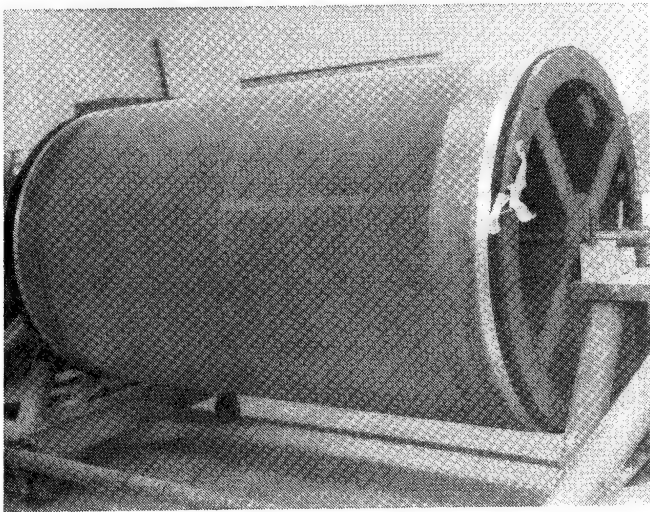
Aluminum Shell Assembled to Mandrel Support Fixture
